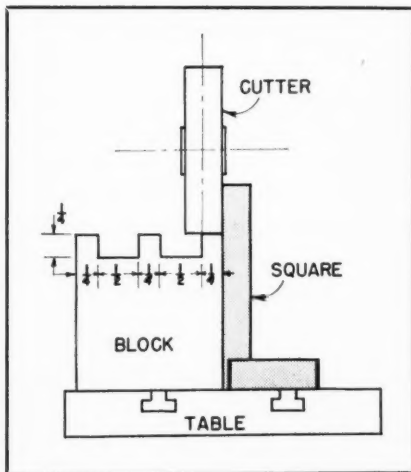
Milling cutter is lined up with square to cut slots in steel block.
